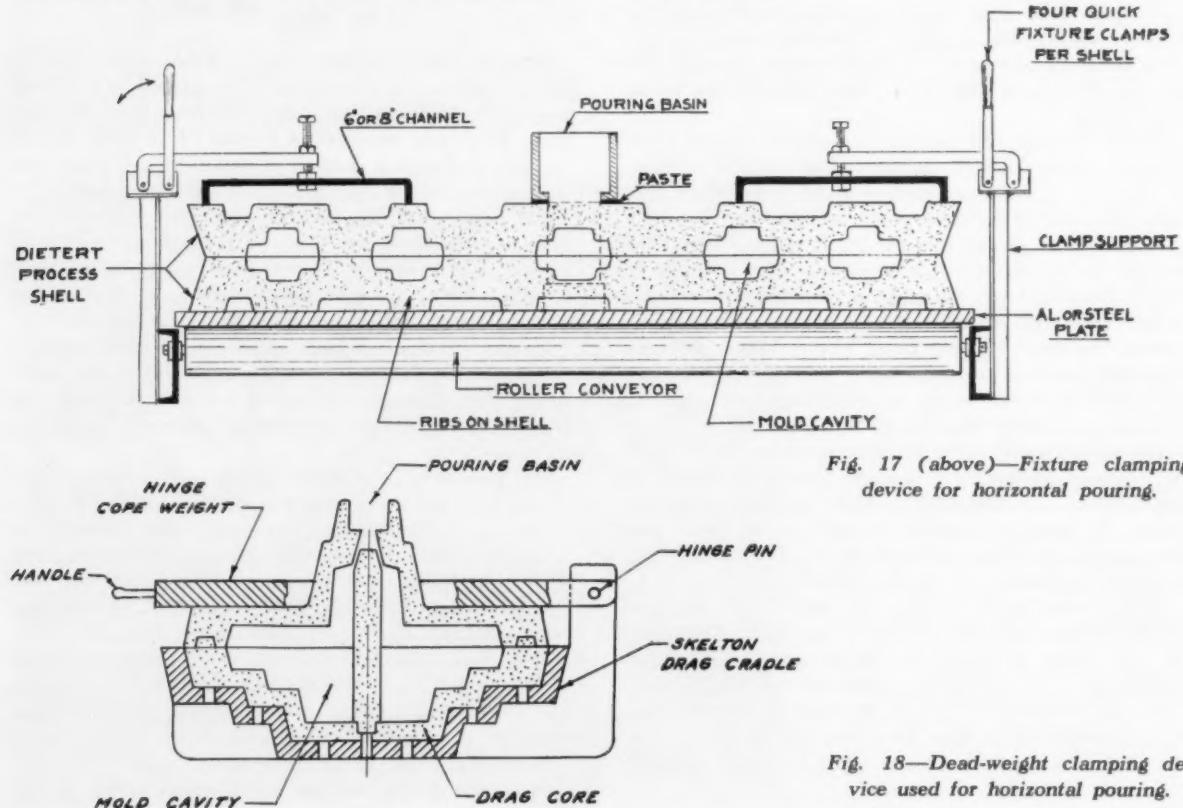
(above)—Fixture clamping device for horizontal pouring.
